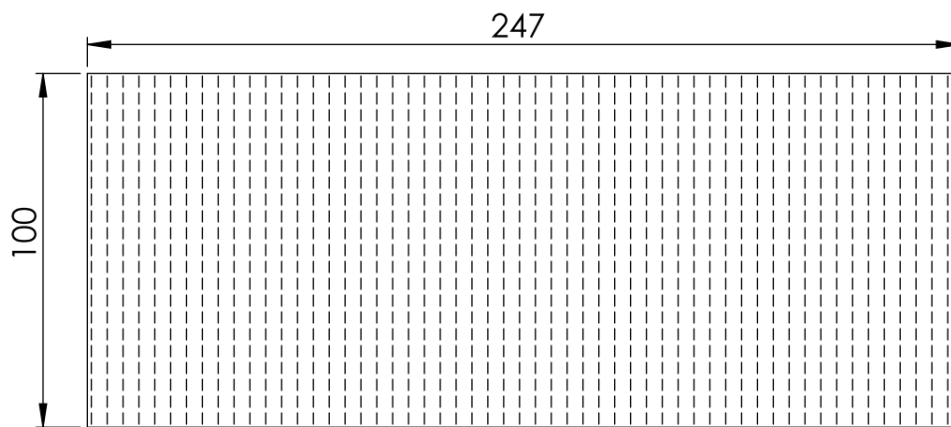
Dimensions of individual plates used for welding in a butt joint configuration
